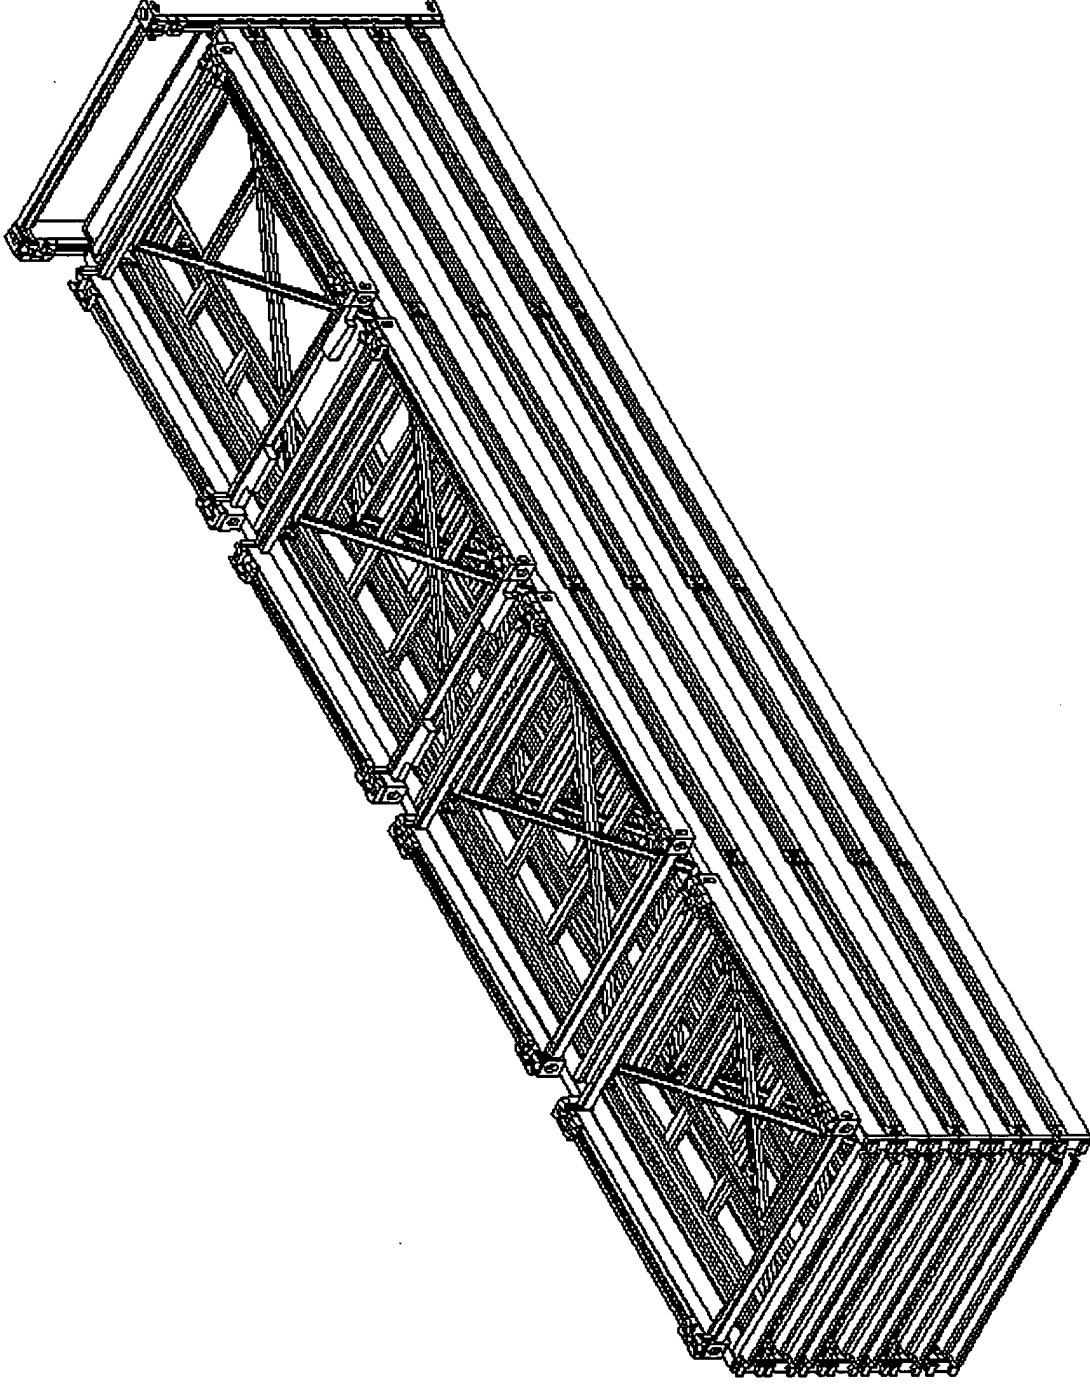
A: Step6 of disassemble and load process: The left frame of the shipping collapsible cargo container is assembled.
